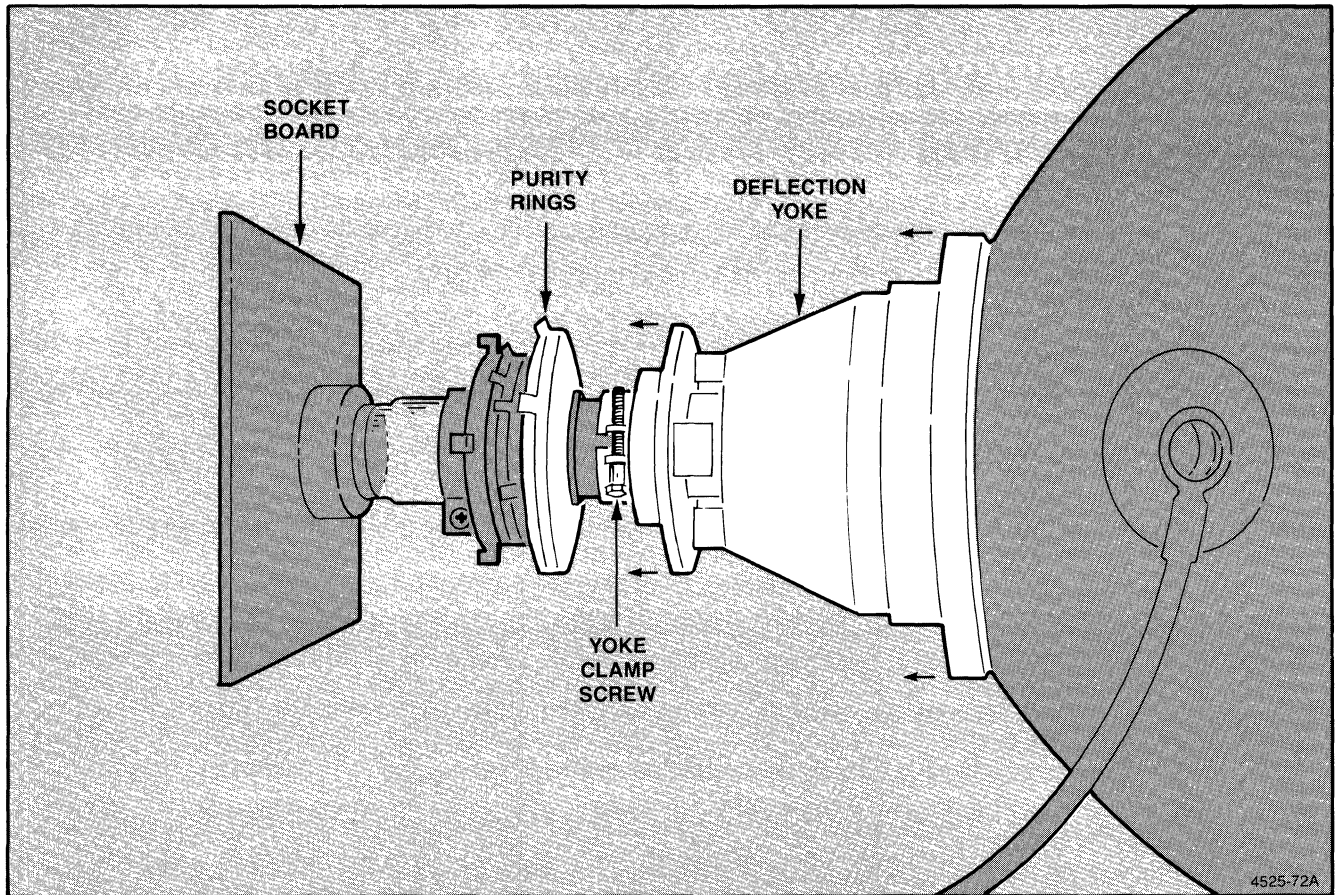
Yoke Clamping Screw and Purity Rings.
